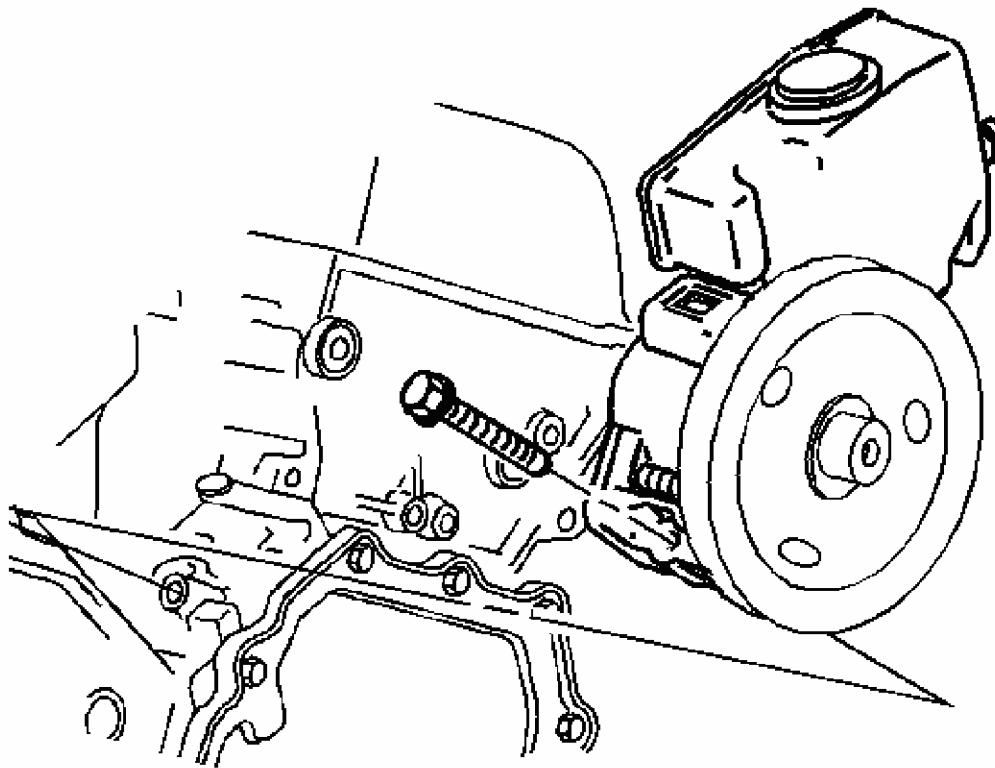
Identifying Power Steering Pump Retaining Bolt
